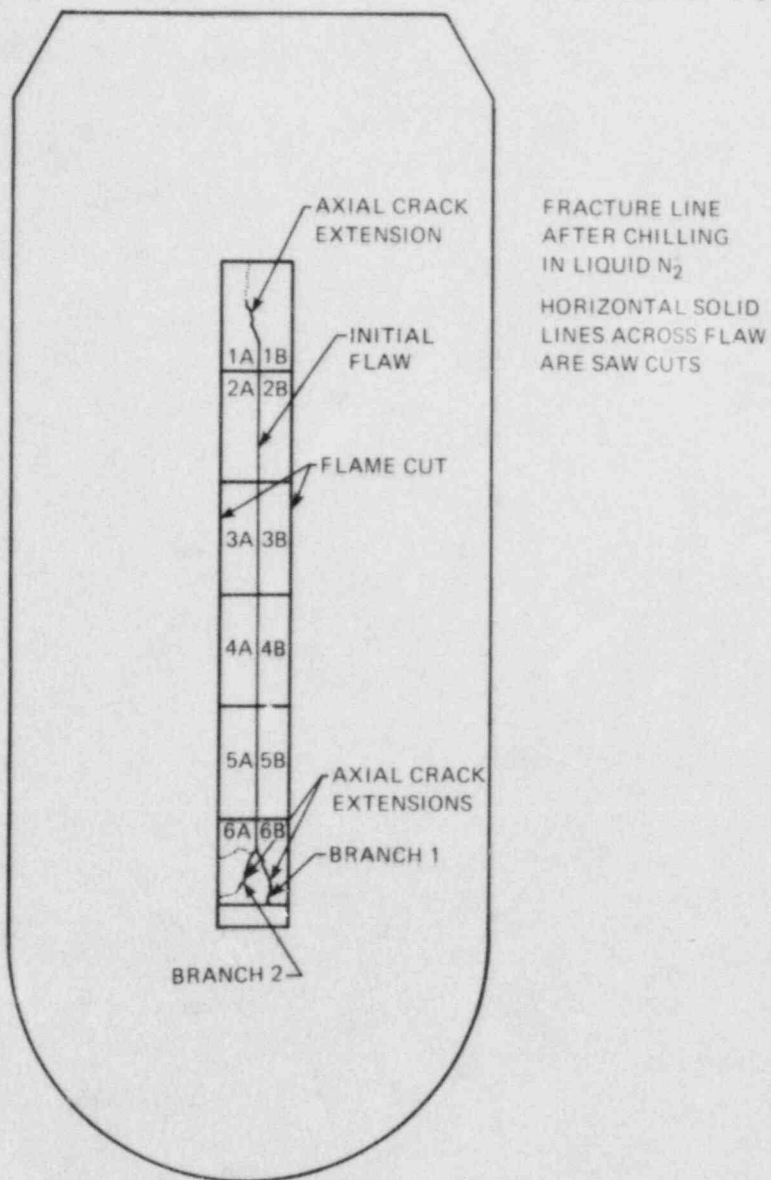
Scheme for cutting and labeling PTSE-1 fracture surfaces. Surfaces labeled A are viewed toward left and B, toward right. Segment 6 contains two branches, designated by surfaces 1 and 2. Main crack and branch 1 mating surfaces are called 6A1 and 6B1, and branch 2 mating surfaces are called 6A2 and 6B2.
